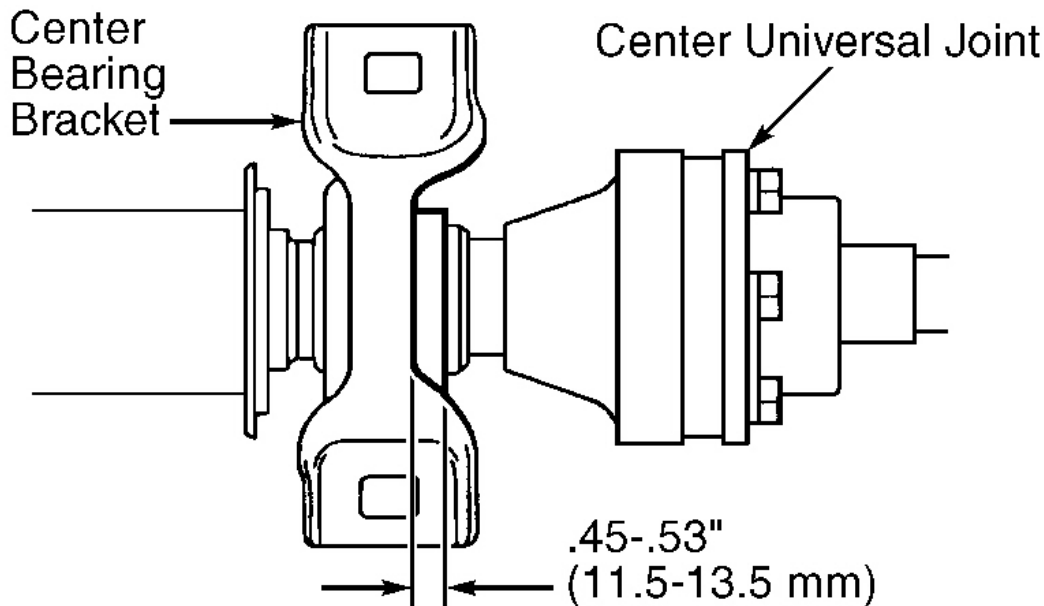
Adjusting Dimension Between Rear Side Of Center Bearing Housing & Rear Side Of Bracket
